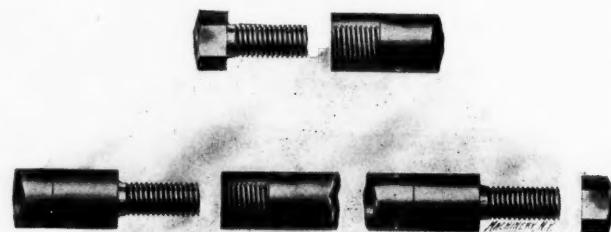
Design of Tie-bolts used for Holding Rack together and Supporting Shelves.
